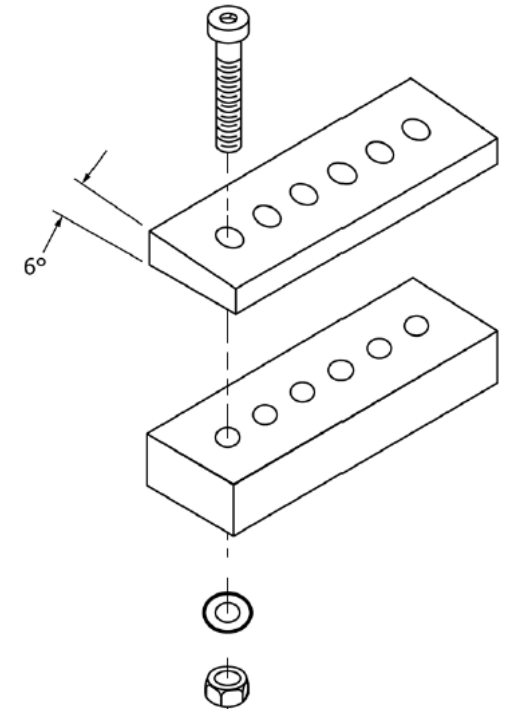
Example of 6° Wedge and Parallel Filler Plate
